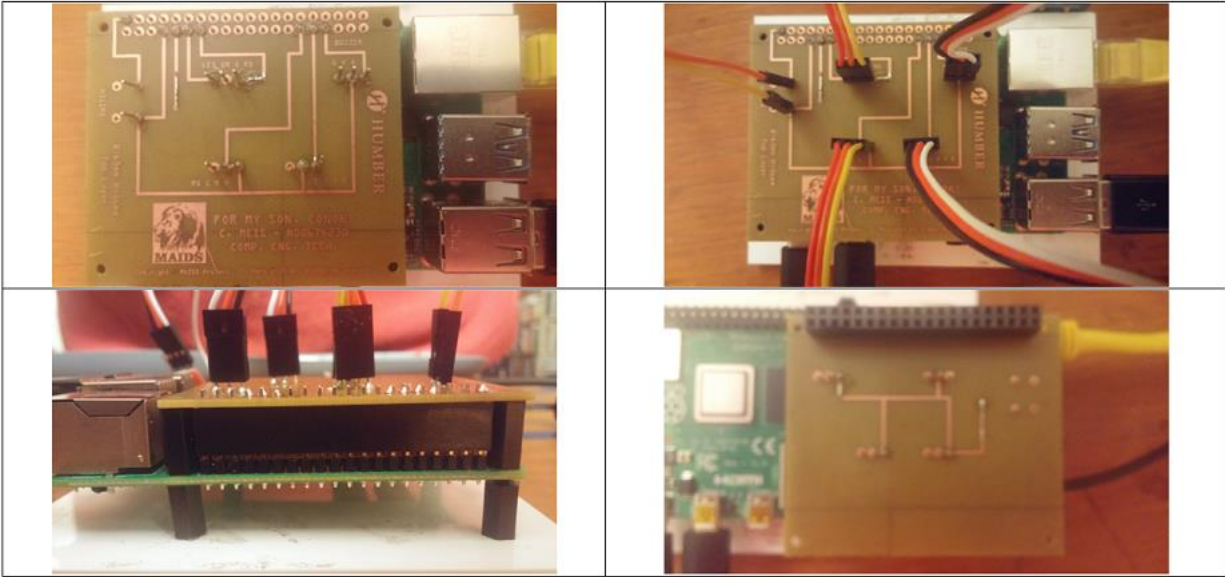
PCB BOARD BOTTOM AND TOP LAYERS.
